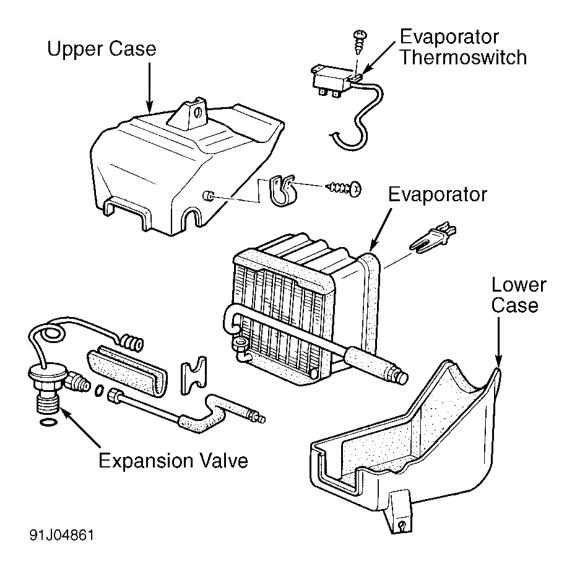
Exploded View Of Evaporator Unit Courtesy of MAZDA MOTORS CORP.
